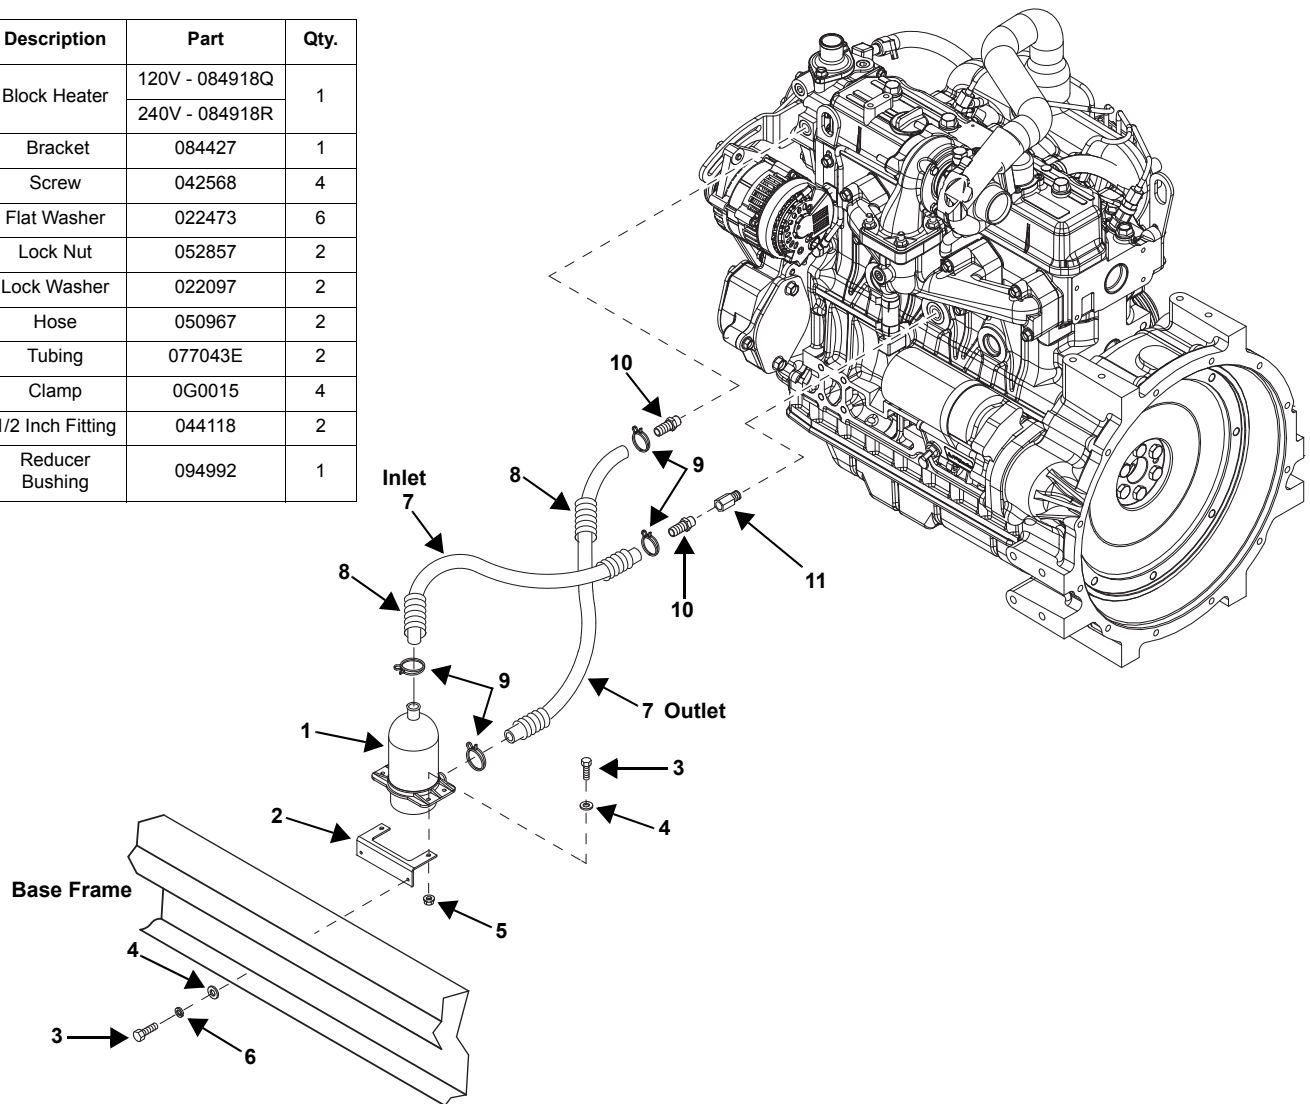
Block Heater Assembly (Exploded View—2.4L Models)
